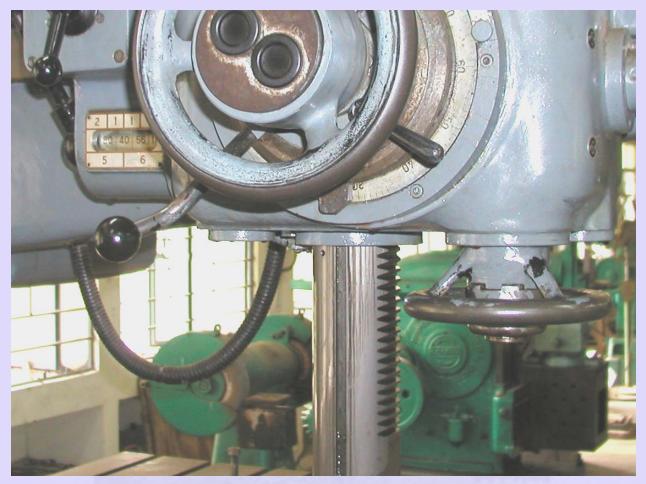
Radial drilling machine spindle movement with rack and pinion arrangement
